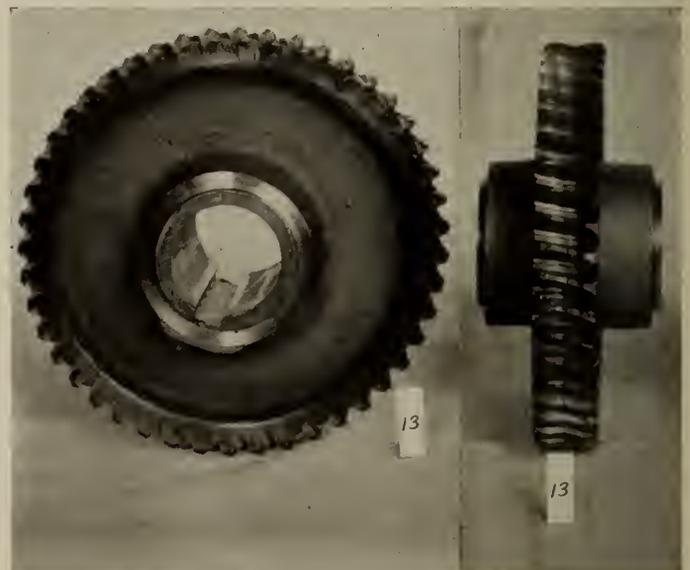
Worm Gear after Test to Destruction, .4 inch c.p., 30-degree p.a. to Mate Double Thread Worm.
